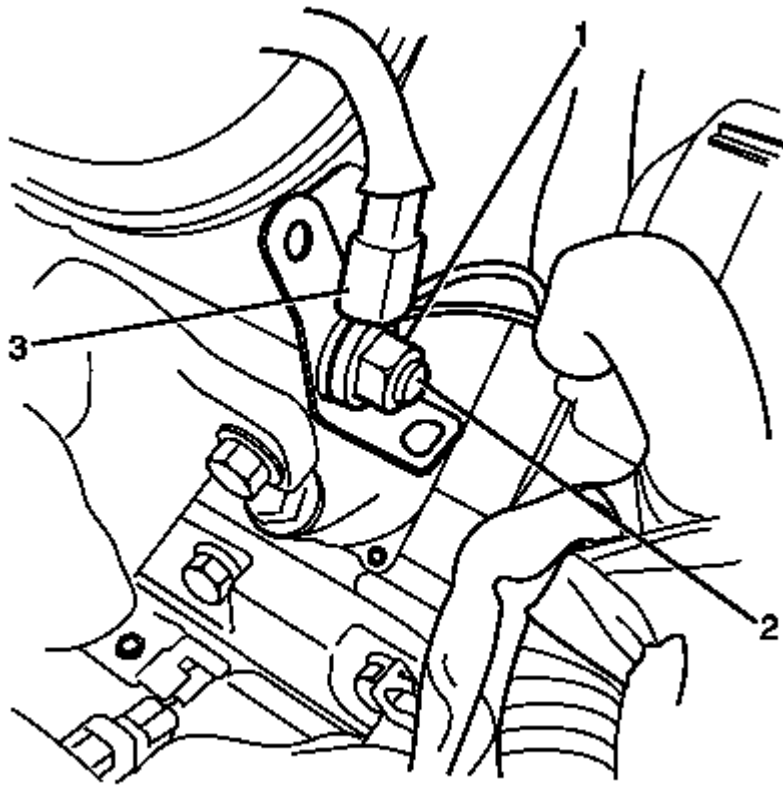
Identifying Vehicle Body Ground Cable To Cylinder Head Retaining Nut
